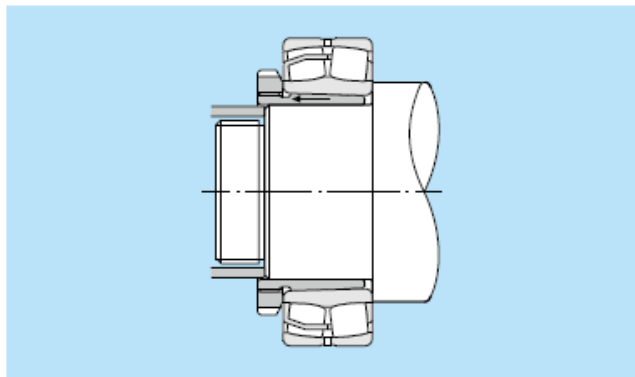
Disassembly of bearing with withdrawal sleeve
